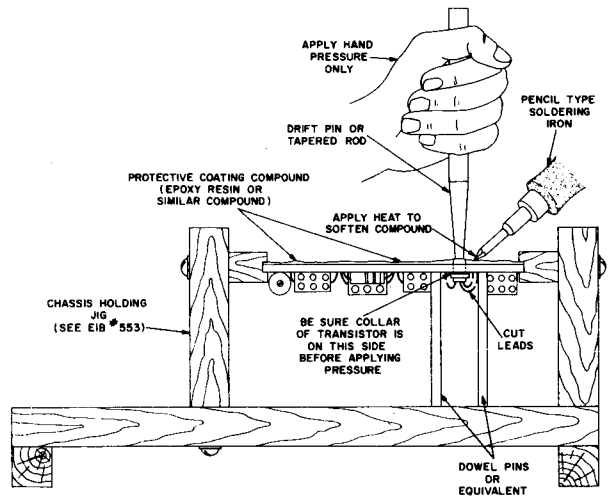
Removing a defective part from bonding compound.
